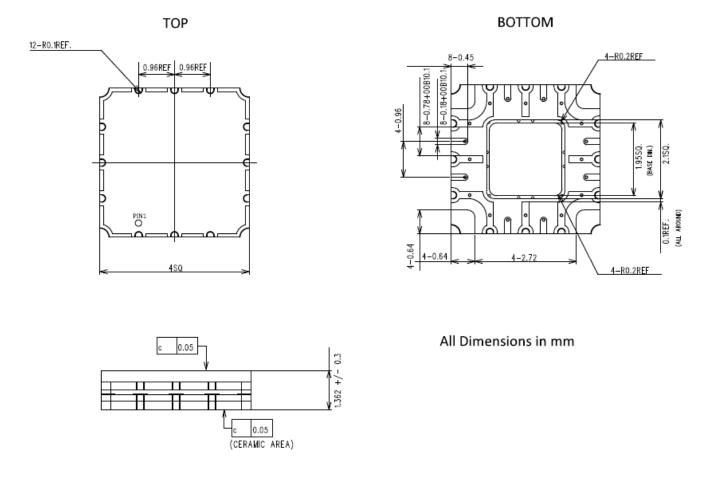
CQFN 24-Pin Package Drawing (All Dimensions in mm)
